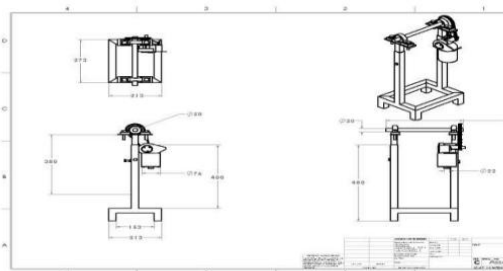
SolidWorks Drawing of the Feeding Mechanism
